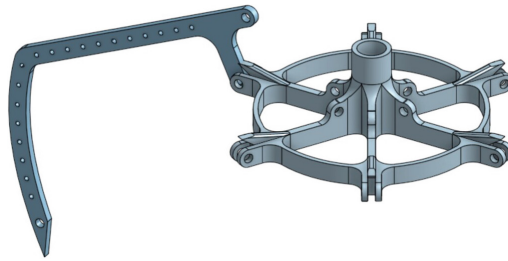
CAD model of the final design, with the mounting holes for the springs and net, have been added to the claw and the number of claws is increased to 6. Additionally, a physical stopper has been added to the base plate located above the claw mounting hole.
